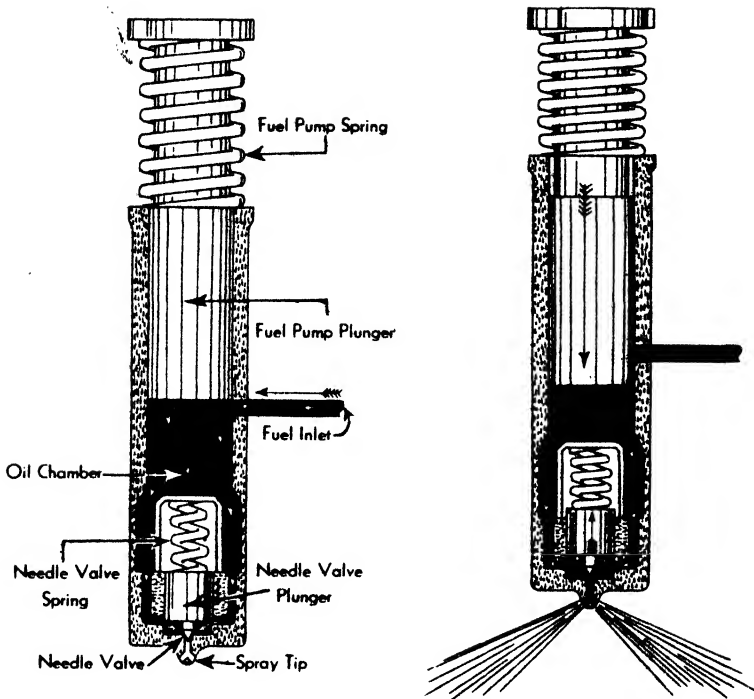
B. FUEL INJECTOR FOR DIESEL ENGINE.
